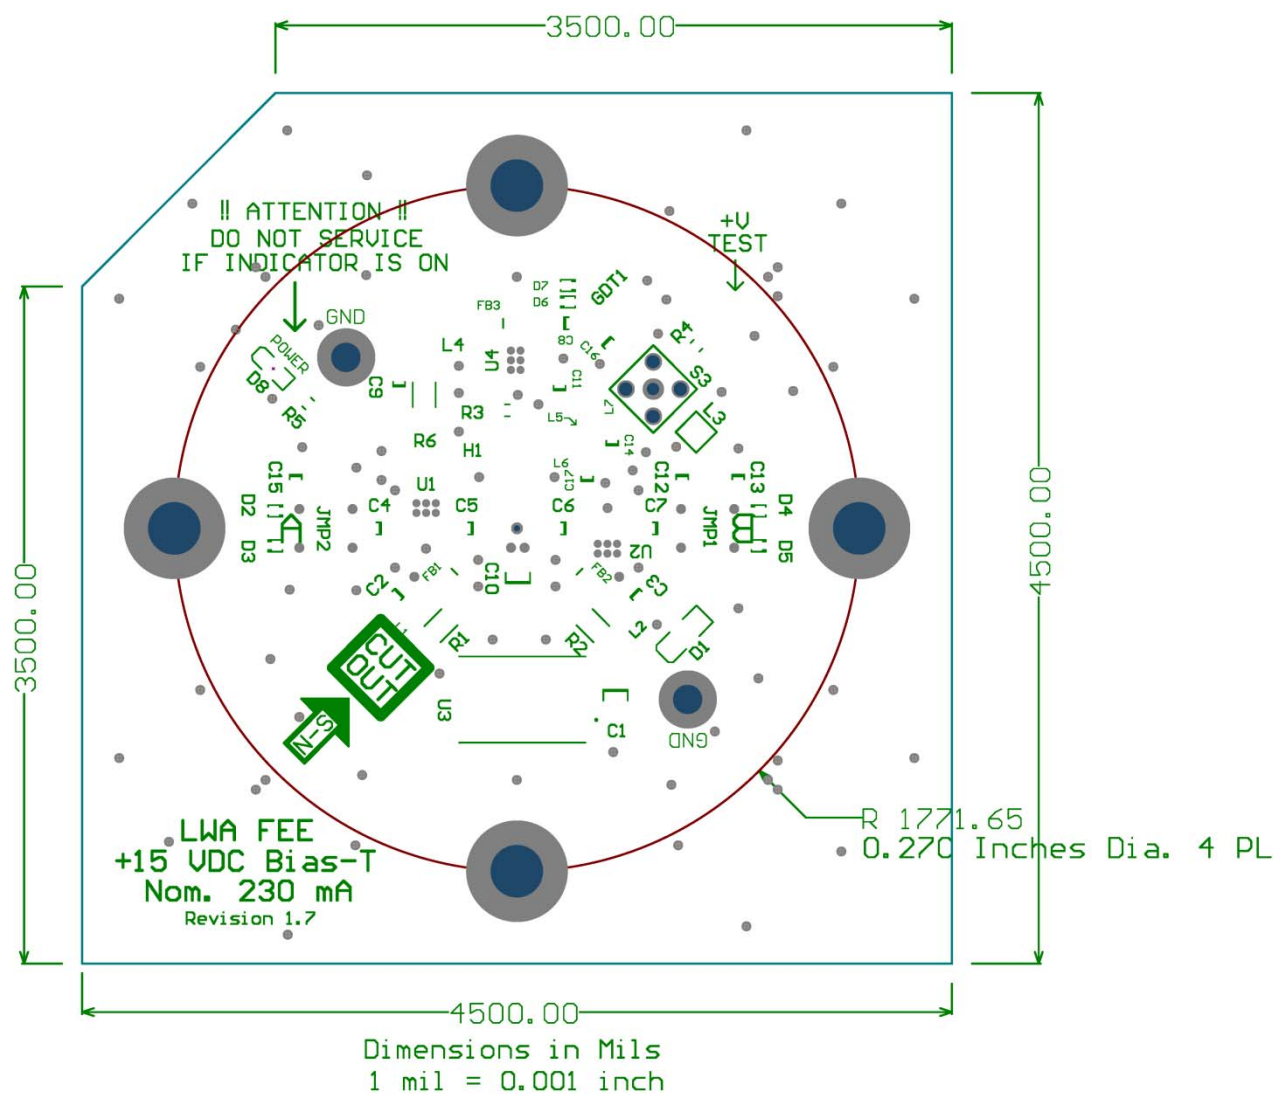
FEE PCB Layout: Top Side (Version 1.7)
